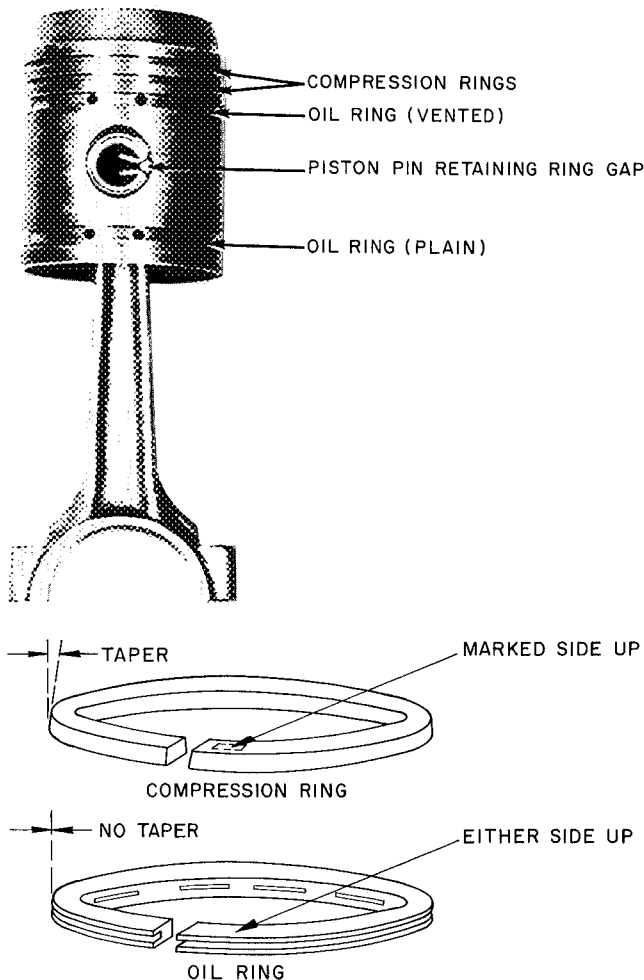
Position of Piston Rings and Piston Pin Retaining Clips
